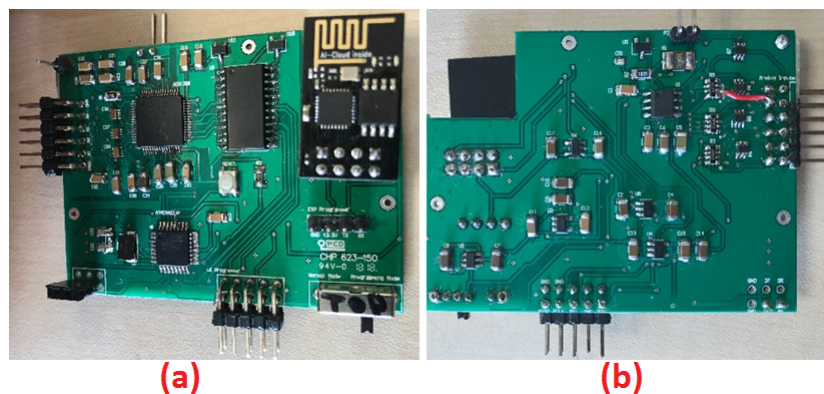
EEG data acquisition hardware circuit implemented on a double-sided PCB (a) Top view (b) Bottom view
